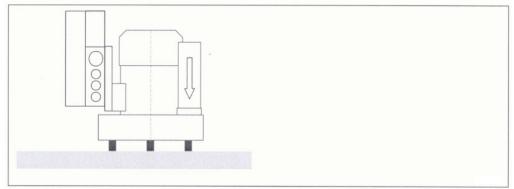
Schematic diagram: installation on the cover of the side channel housing
